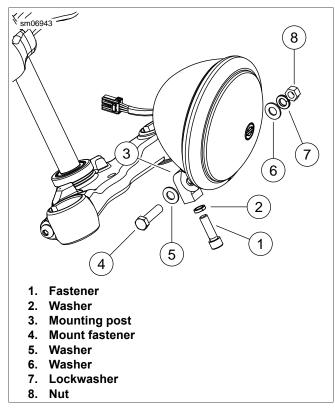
Headlamp Assembly Mount: XL 1200X
